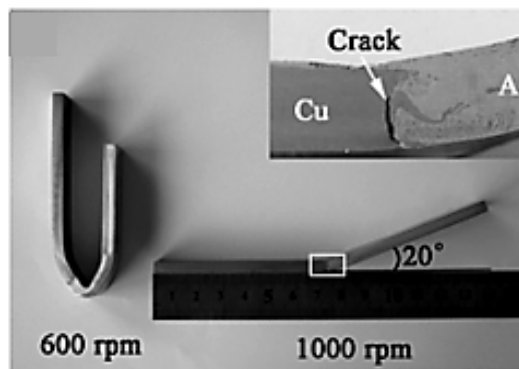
Fractured specimen of Al/Cu FSW welded joints after bending test
